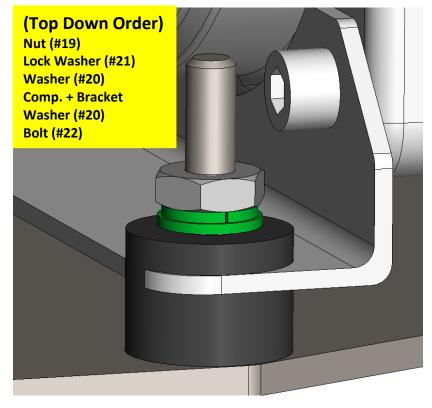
Standard Air Compressor fasteners "Stack-Up"
